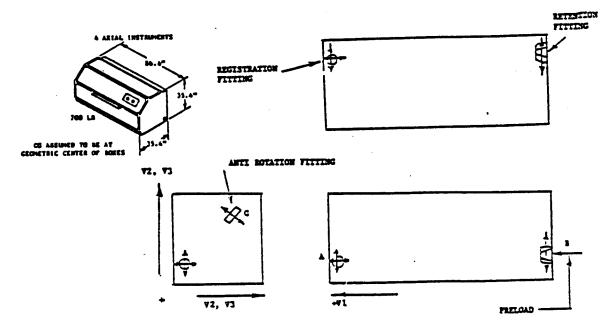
Axial SI Mounting Arrangement and Constraints
